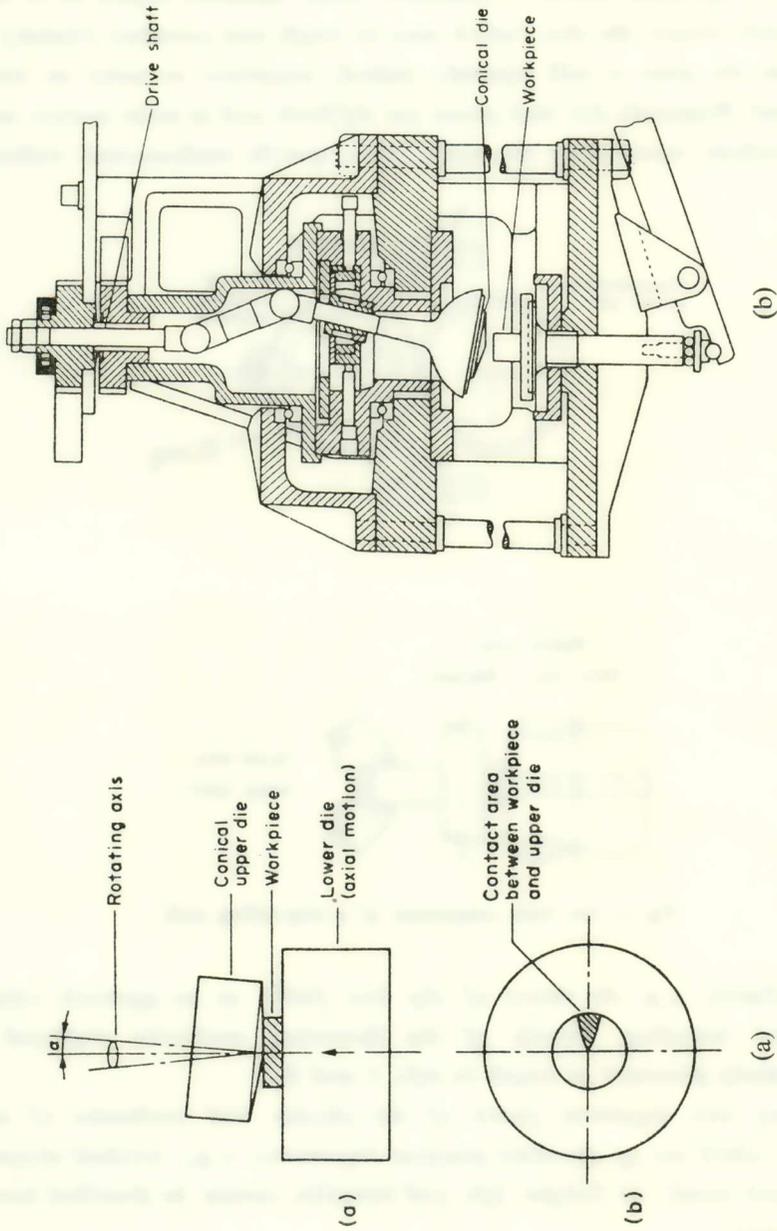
(a) The principle of rotary forging. (b) A small scale model of a rotary forging machine.
